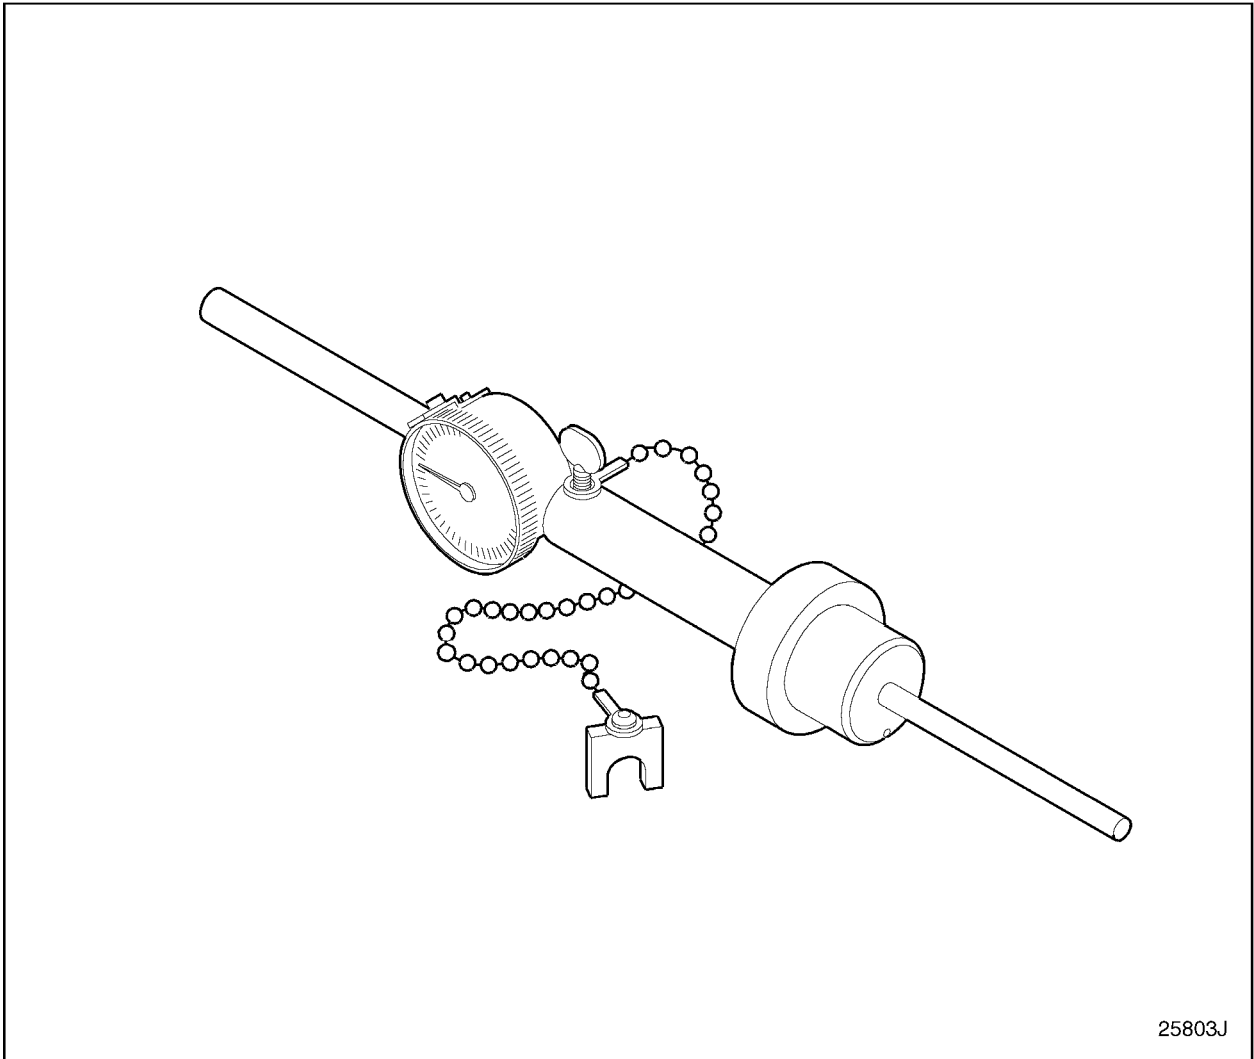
Gearcase Reaming Fixture,J 43030
